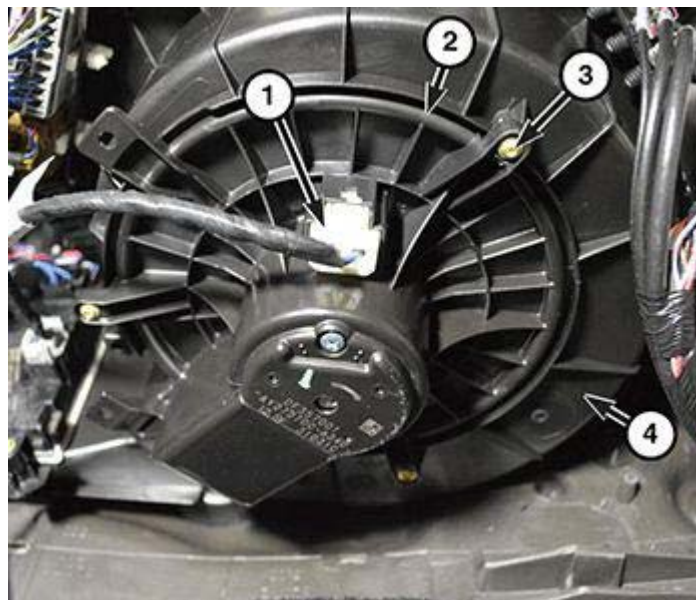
Wire Harness Connector, Blower Motor, Screws & HVAC Housing
